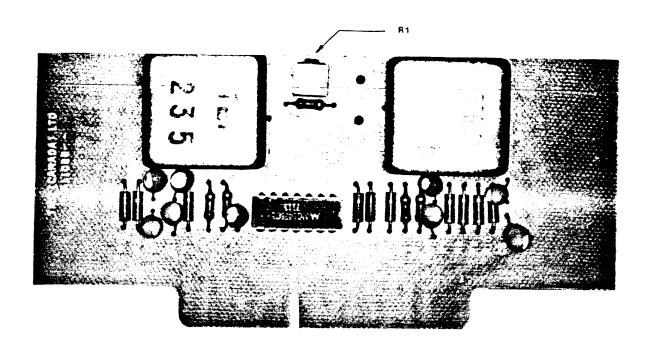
HYBRID CIRCUIT ASSEMBLY A11086-5
